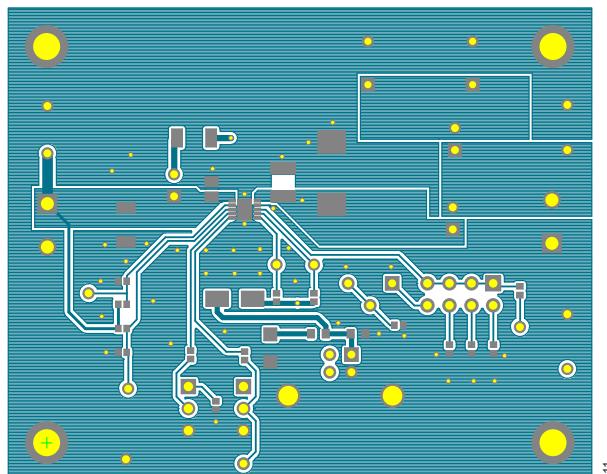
ADPL86610 EV Kit PCB Layout—Top Layer
